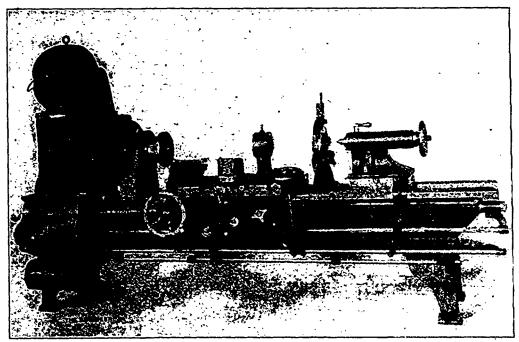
24-inch Screw-cutting Lathe driven by a C-W Form I Motor with MV Control.
